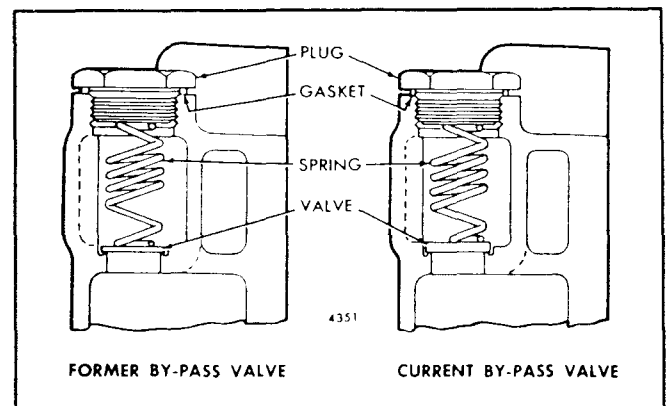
By-Pass Valve Assembly Secured by Plug
